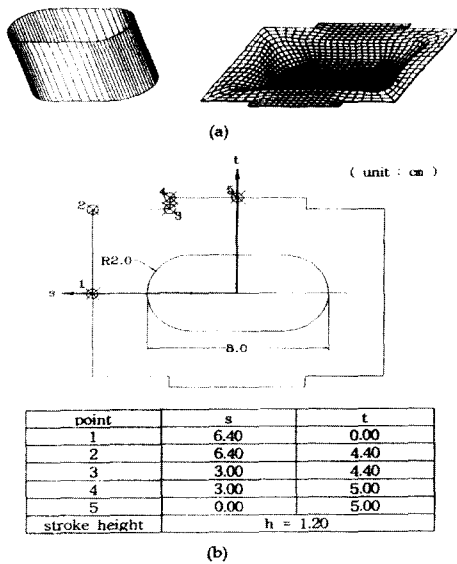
Desired final shape of the cup with flange and the punch deformed blank
